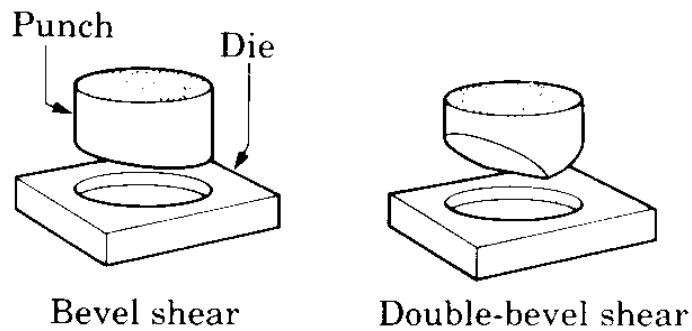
(l) Single bevel shear, (r) double bevel shear³
